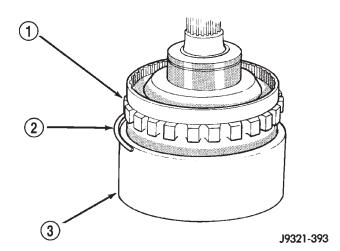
Clutch Drum And Outer Retaining Ring Installation
